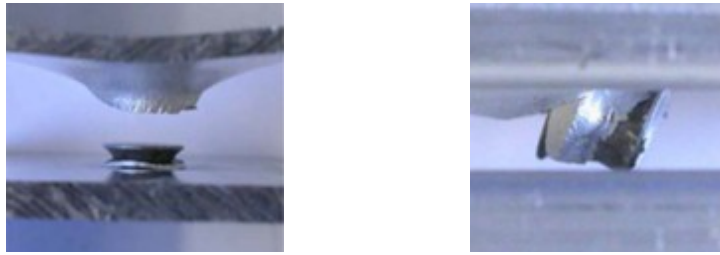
punch side failure (left) and matrix side failure (right) of semi tubular self-piercing rivet joints [2]
